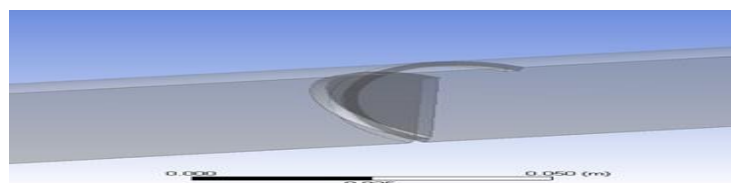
Vertical Symmetry of the 3D Swing Plate Check Valve Showing the Valve Opening From the Bottom of the Hinge.
